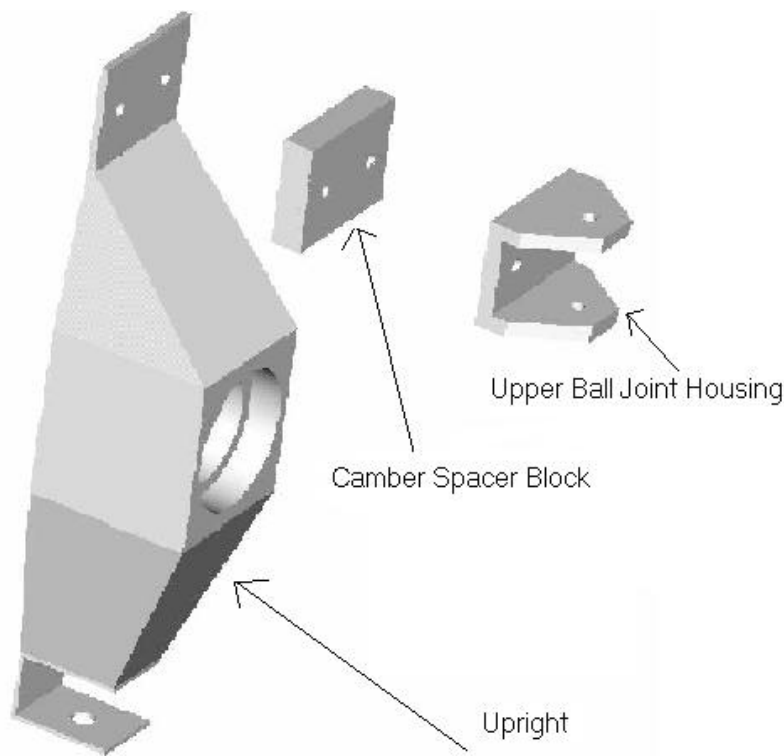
Exploded view illustrating replaceable spacer block to adjust camber
